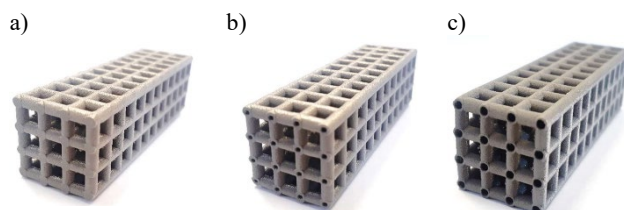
Actual view of the insert – a) W0; b) W1.5; c) W2.25
